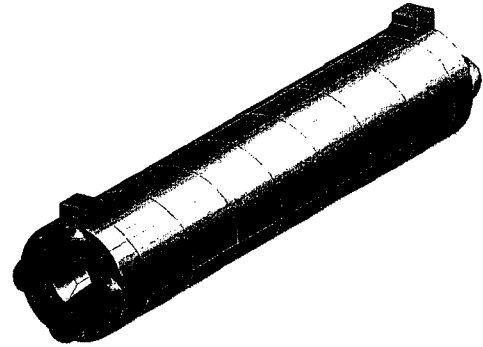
(a) Schematic view of the shell-and-tube heat exchanger with spiral baffle plates (external view)
